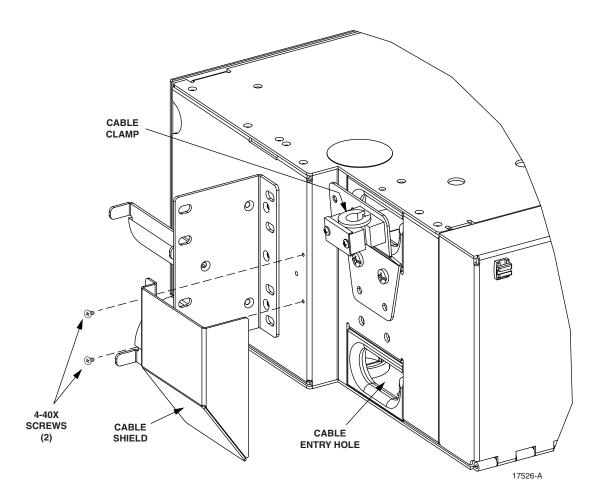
Cable Shield Components (Shield Shown is Used With Overhead Cable)
